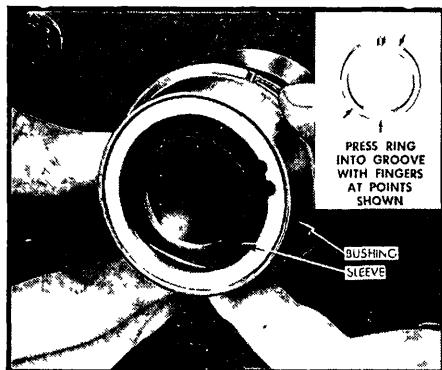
Sealing rings, bushing and sleeve on reaction flange hub
